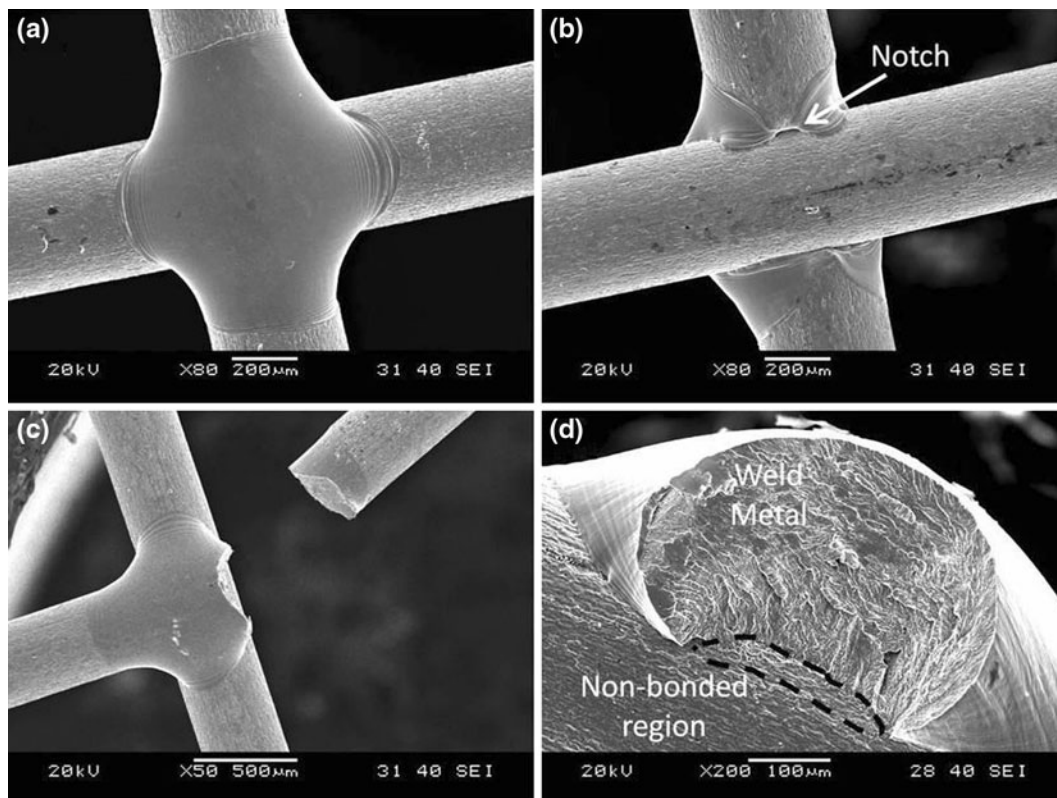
SEM images of welds made at 0.6 kW peak power for the (a) weld top, (b) weld bottom, (c) fractured weld, and (d) fracture surface.
